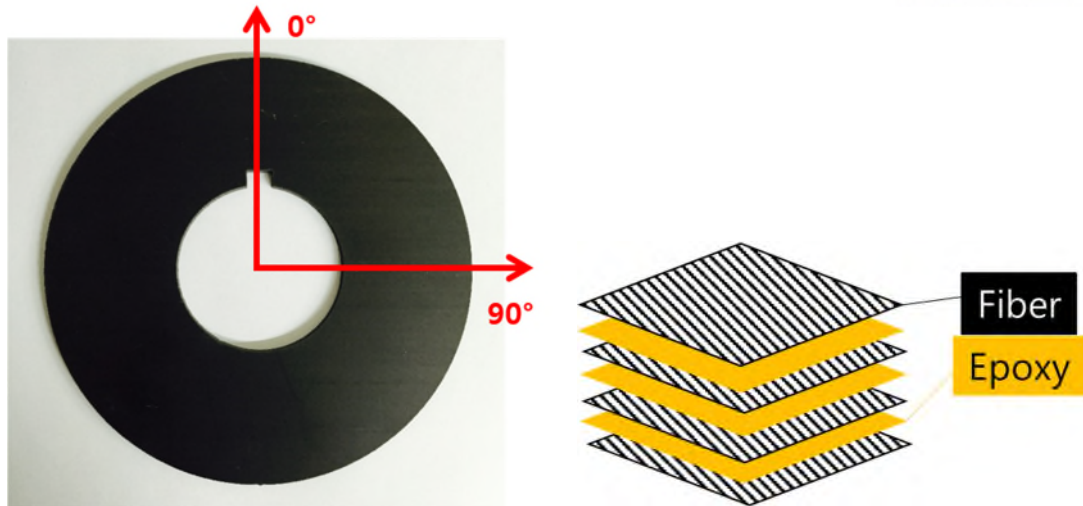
Workpiece of UD CFRP orthogonal cutting
